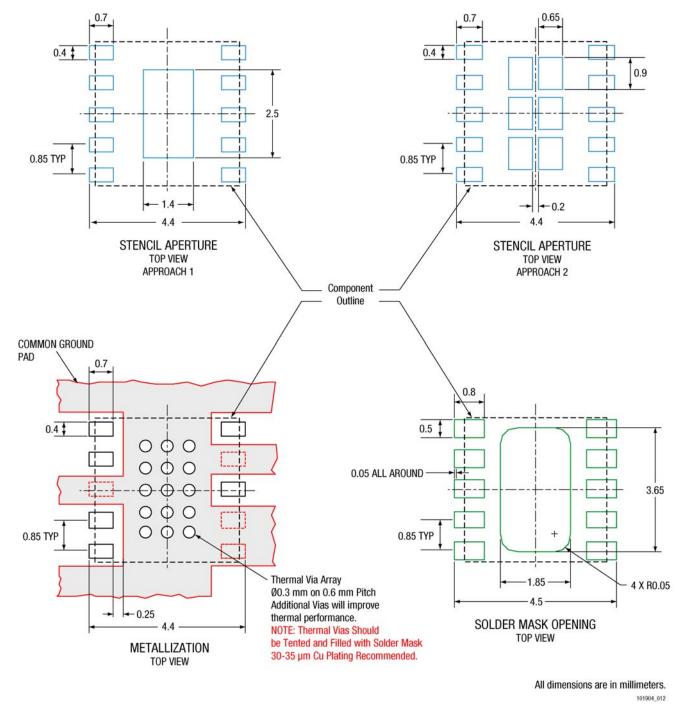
Phone PCB Layout Footprint for 4 x 4 mm, 10-Pin Package – CX77112
